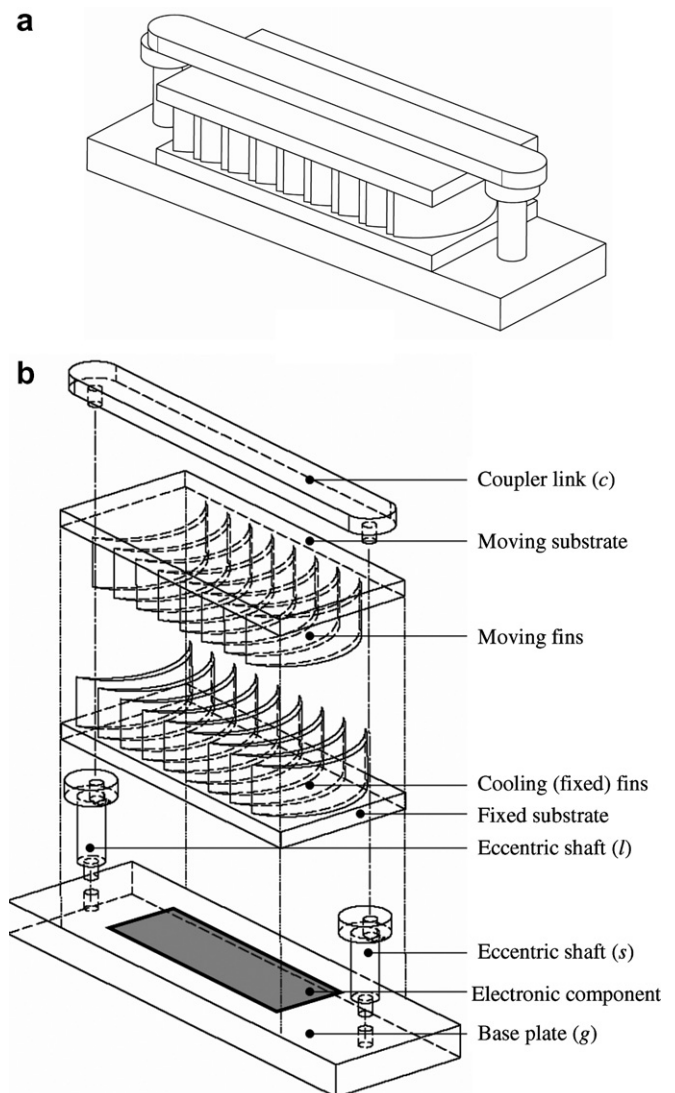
Schematic diagrams of the scroll heat sink: (a) after assembling all the parts and (b) exploded schematic diagram.
